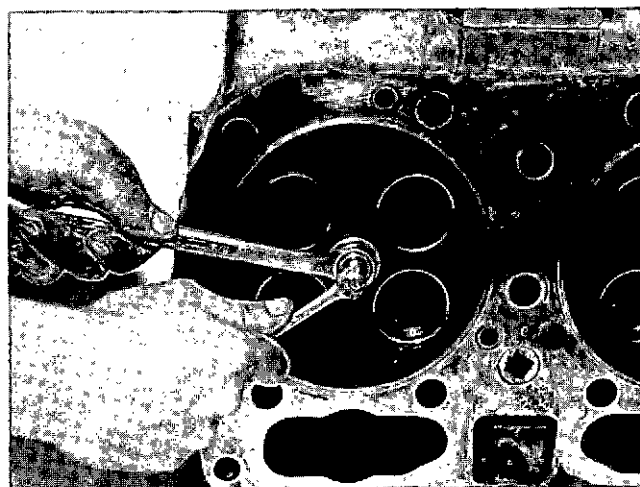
, V40204. Install injector sleeve holding tool
